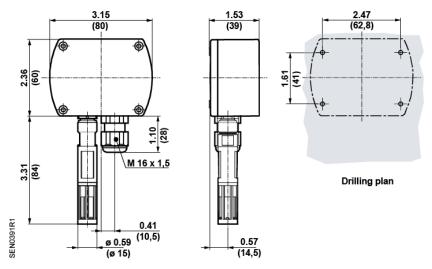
QFA31 Series Sensors Dimensions in Inches (Millimeters).
